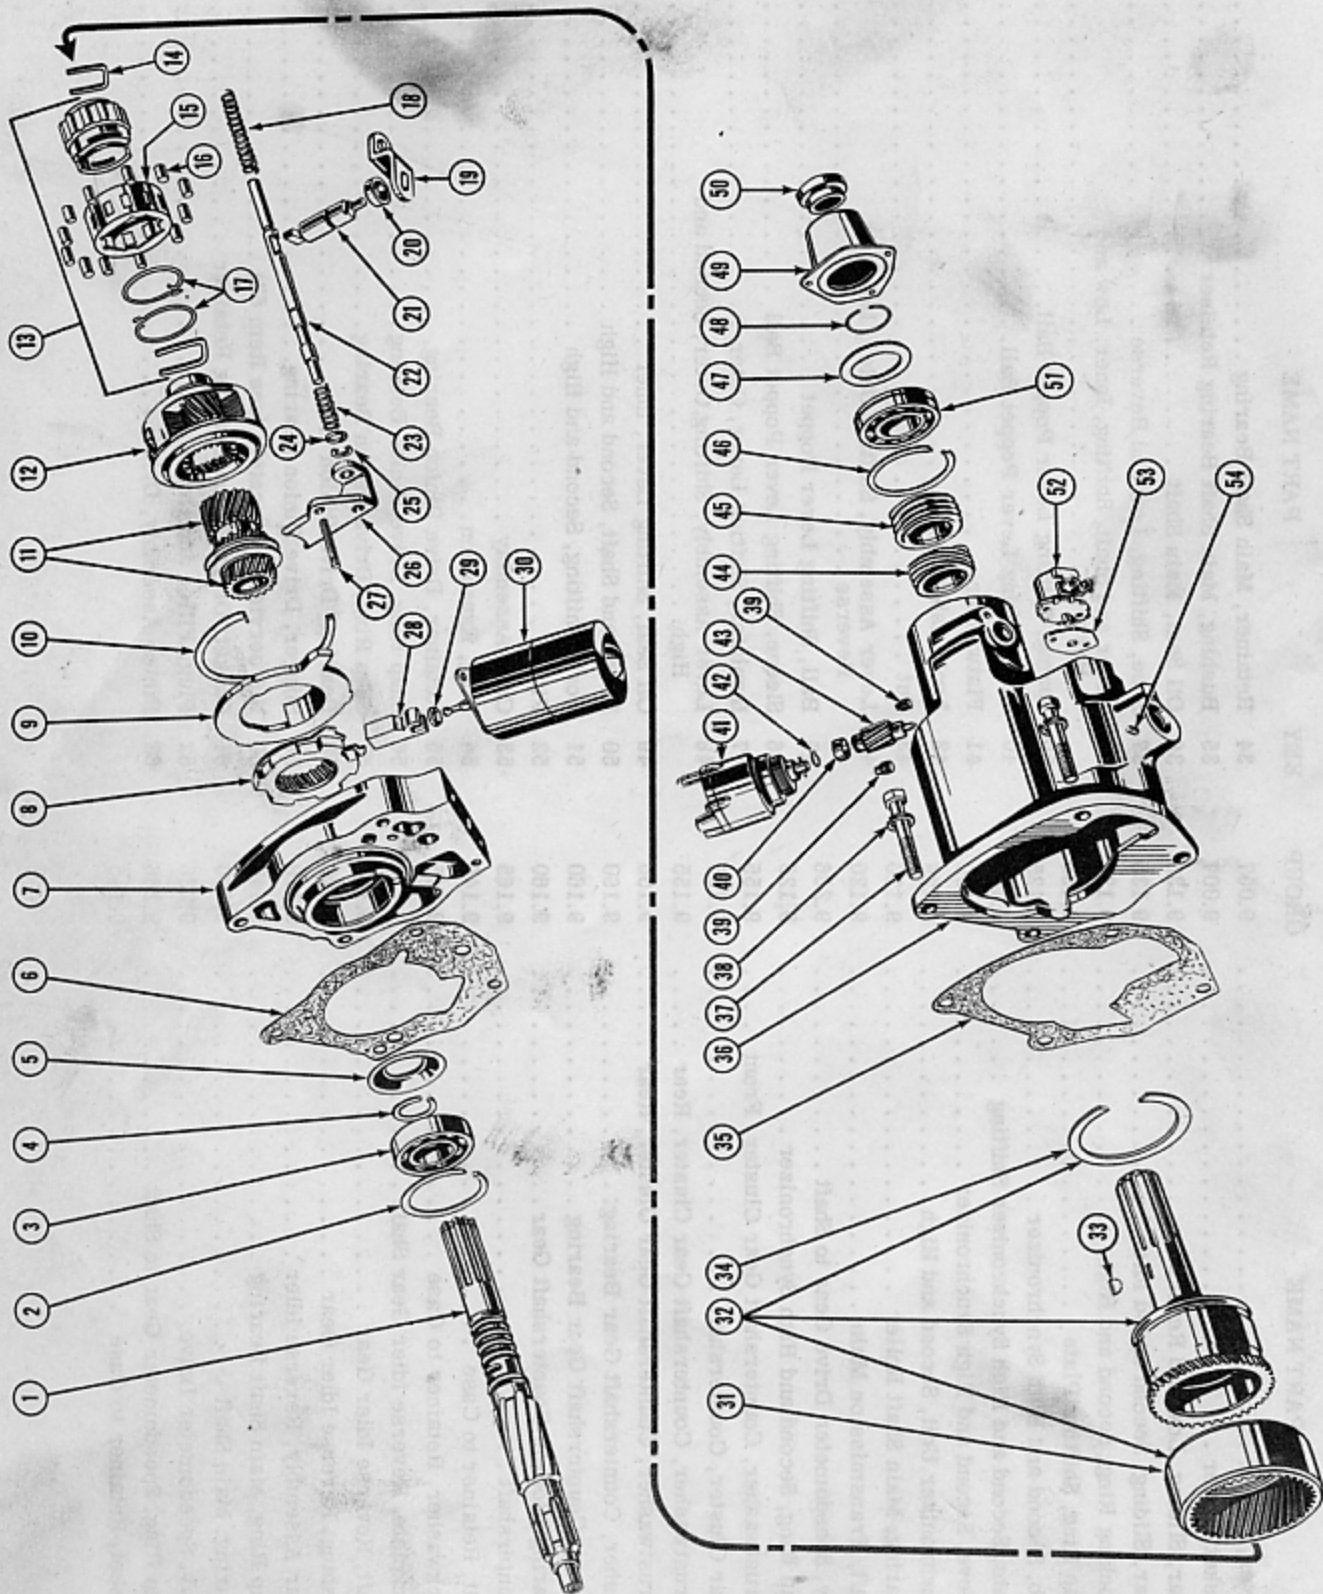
TYPICAL OVERDRIVE UNIT - EXPLODED VIEW
